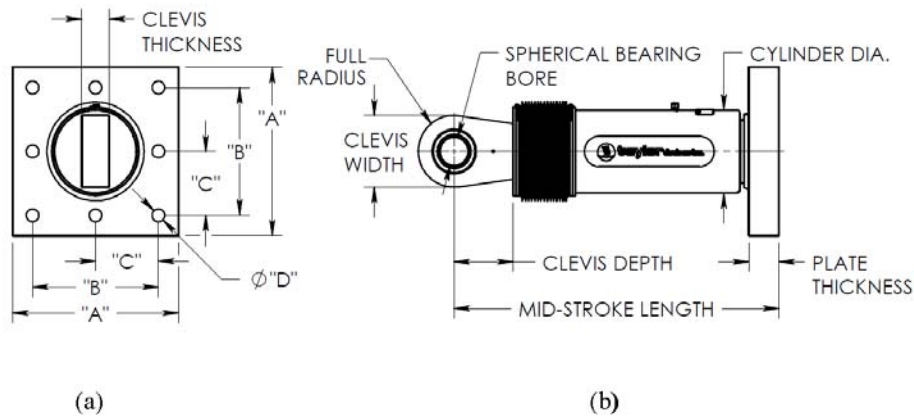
Fluid viscous damper detail and dimensions; (a) Front view, (b) Side view
